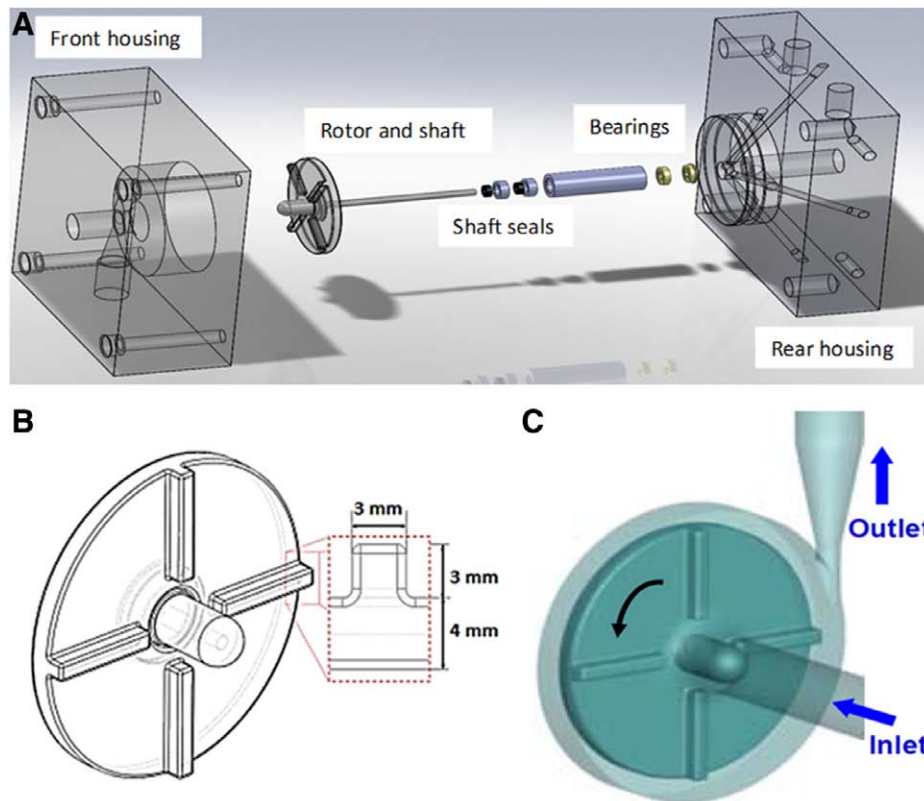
A: Assembly drawing for FDA benchmark pump model. B: Enlargement of rotor showing dimensions of rounded blade edges. C: Computer model of pump. [full color online](#)
